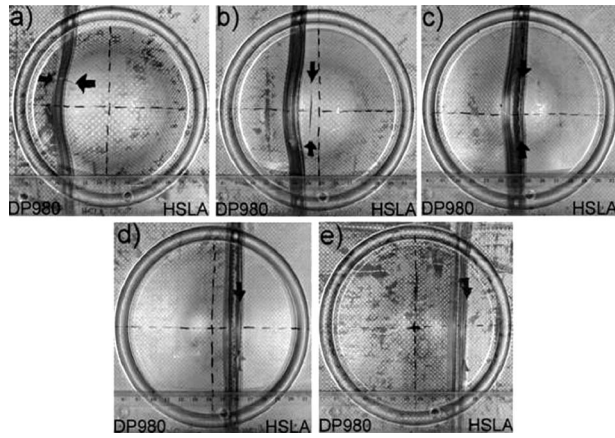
Biaxial-stretch formed DP980-HSLA laser welded coupons with different weld locations from center: (a) -30 mm, (b) -15 mm, (c) center, (d) 15 mm, and (e) 30 mm.
